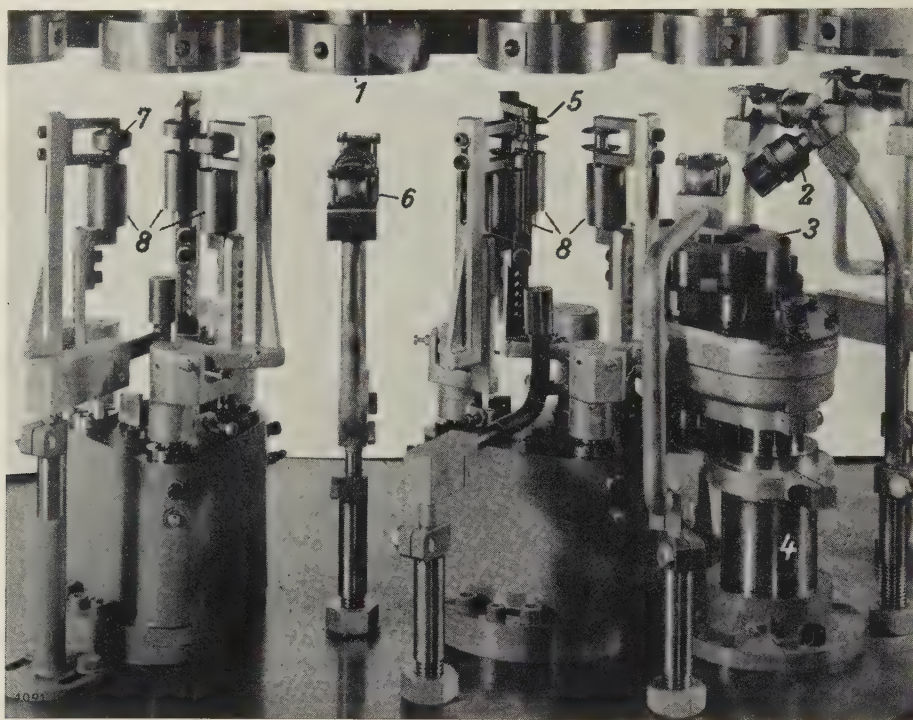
Part of the 32-head glass-tubing machine where the stretching and rolling process takes place. 1 one of the six chucks visible. 2 one of the burners. 3 chuck on vertically reciprocating rod 4 for stretching. 5 indenting wheels (for the first stage; see fig. 20). 6 burners for reheating. 7 roller for second stage. During the rolling process the lower part of the tube is centred by the rollers 8.
